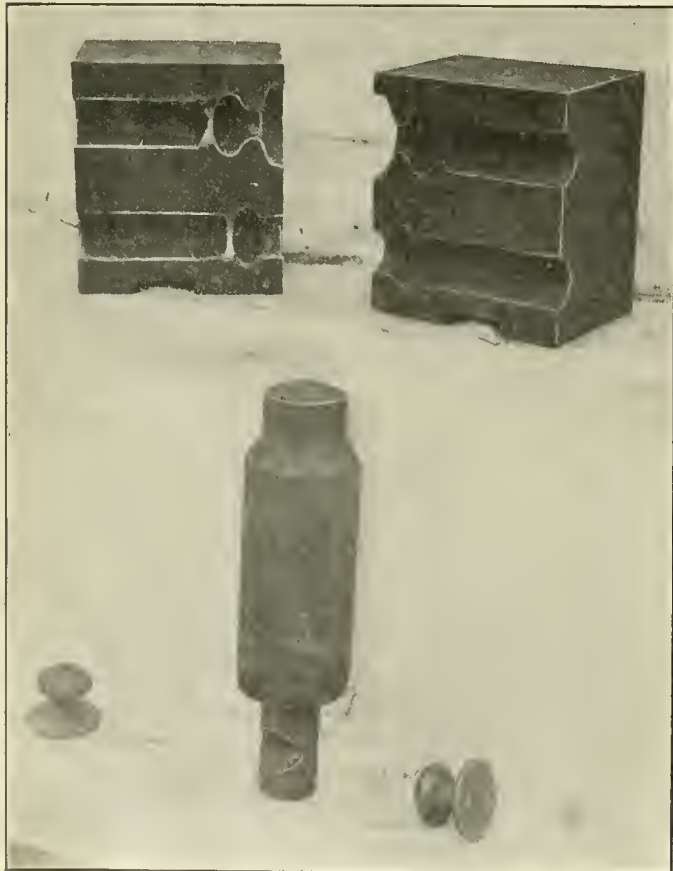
DIES AND FORMER FOR BAGGAGE CAR DOOR KNOB.
